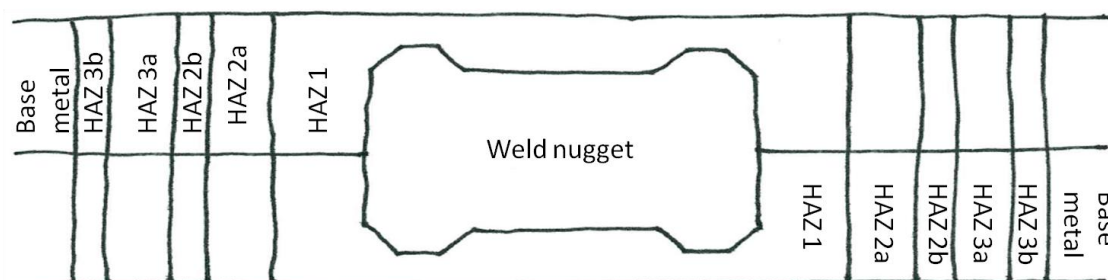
Schematic representation of a cross section of a resistance spot welded joint after the post weld re-melt step.
